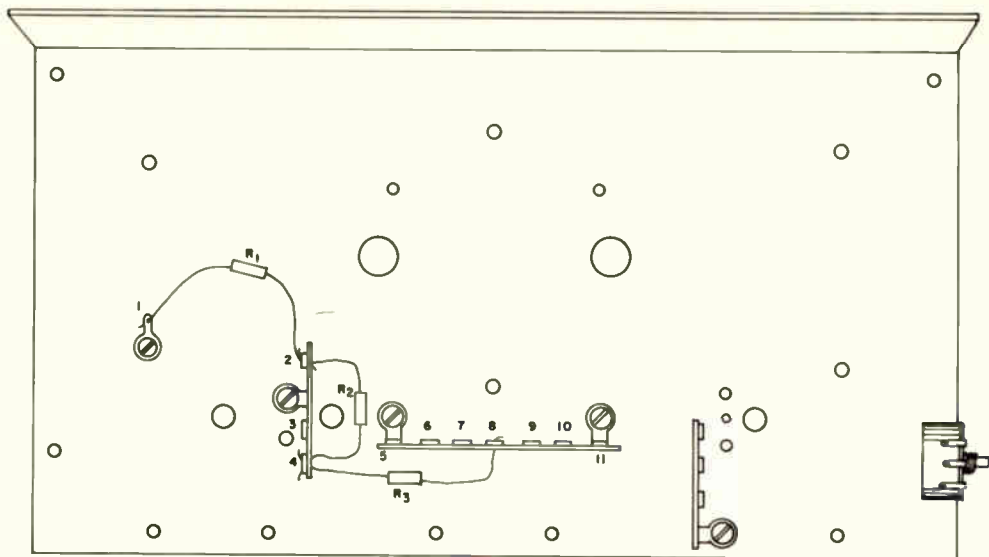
Top view of the chassis, showing the resistors you will install in this experiment.
